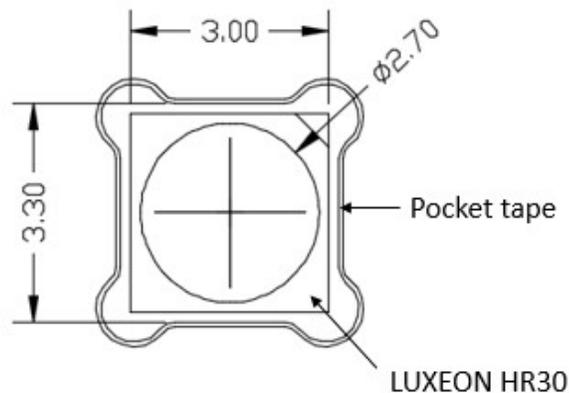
LUXEON emitter in a pocket tape. Dimensions in mm. Best to use nozzle with outer diameter between 2.7mm and 3.3mm to avoid interfering with the pocket tape cavity or picking solely from the silicones.
